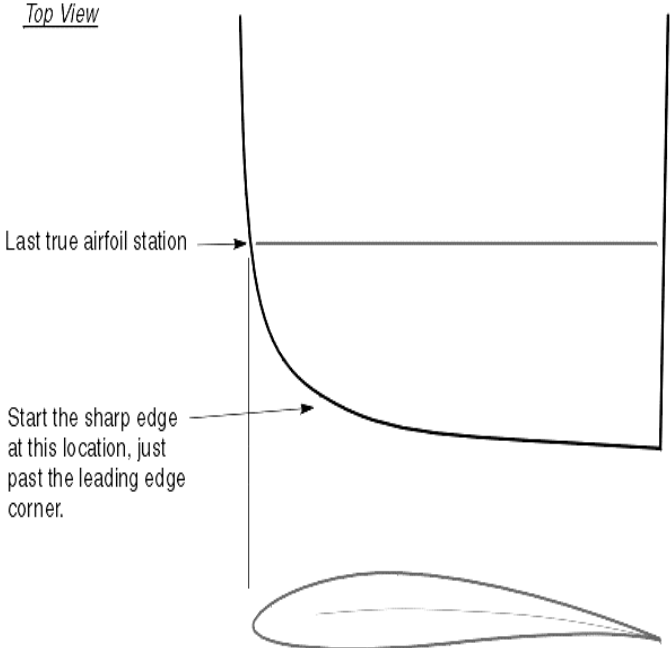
LTP3 Blade, Top View Detail of Planform Geometry
